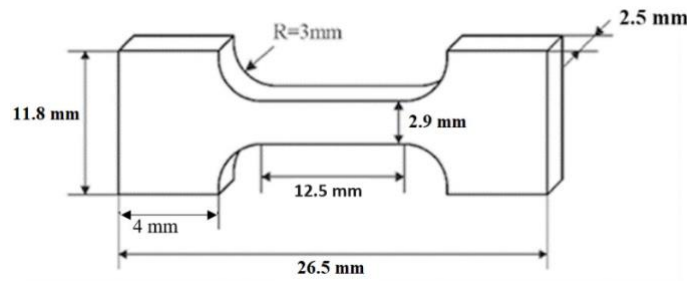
Dimensions of the tensile samples machined from a block printed using PBF-LB/M
